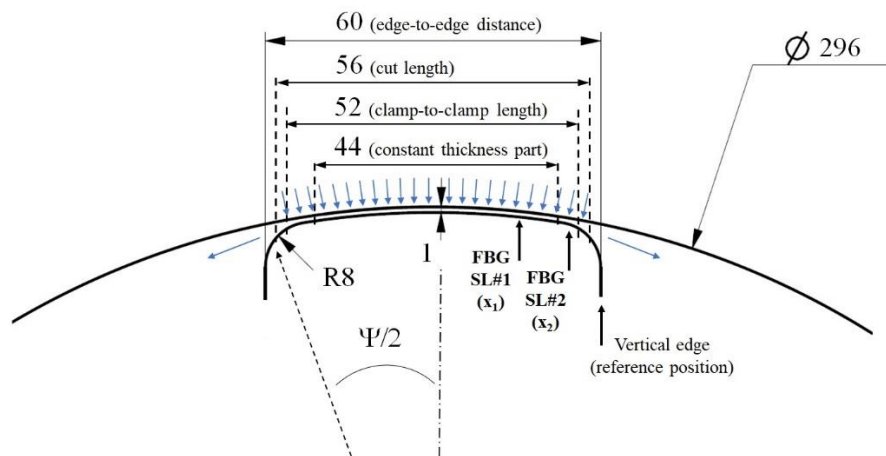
Section cut along a shell blade showing main manufacturing dimensions.
